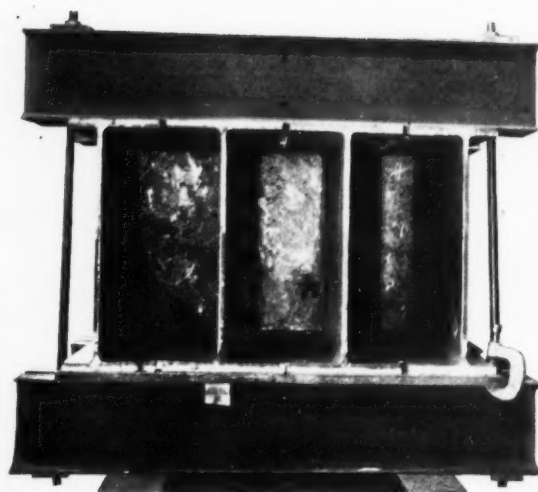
Structural Members of Base Shown in Fig. 1 Assembled for Welding
